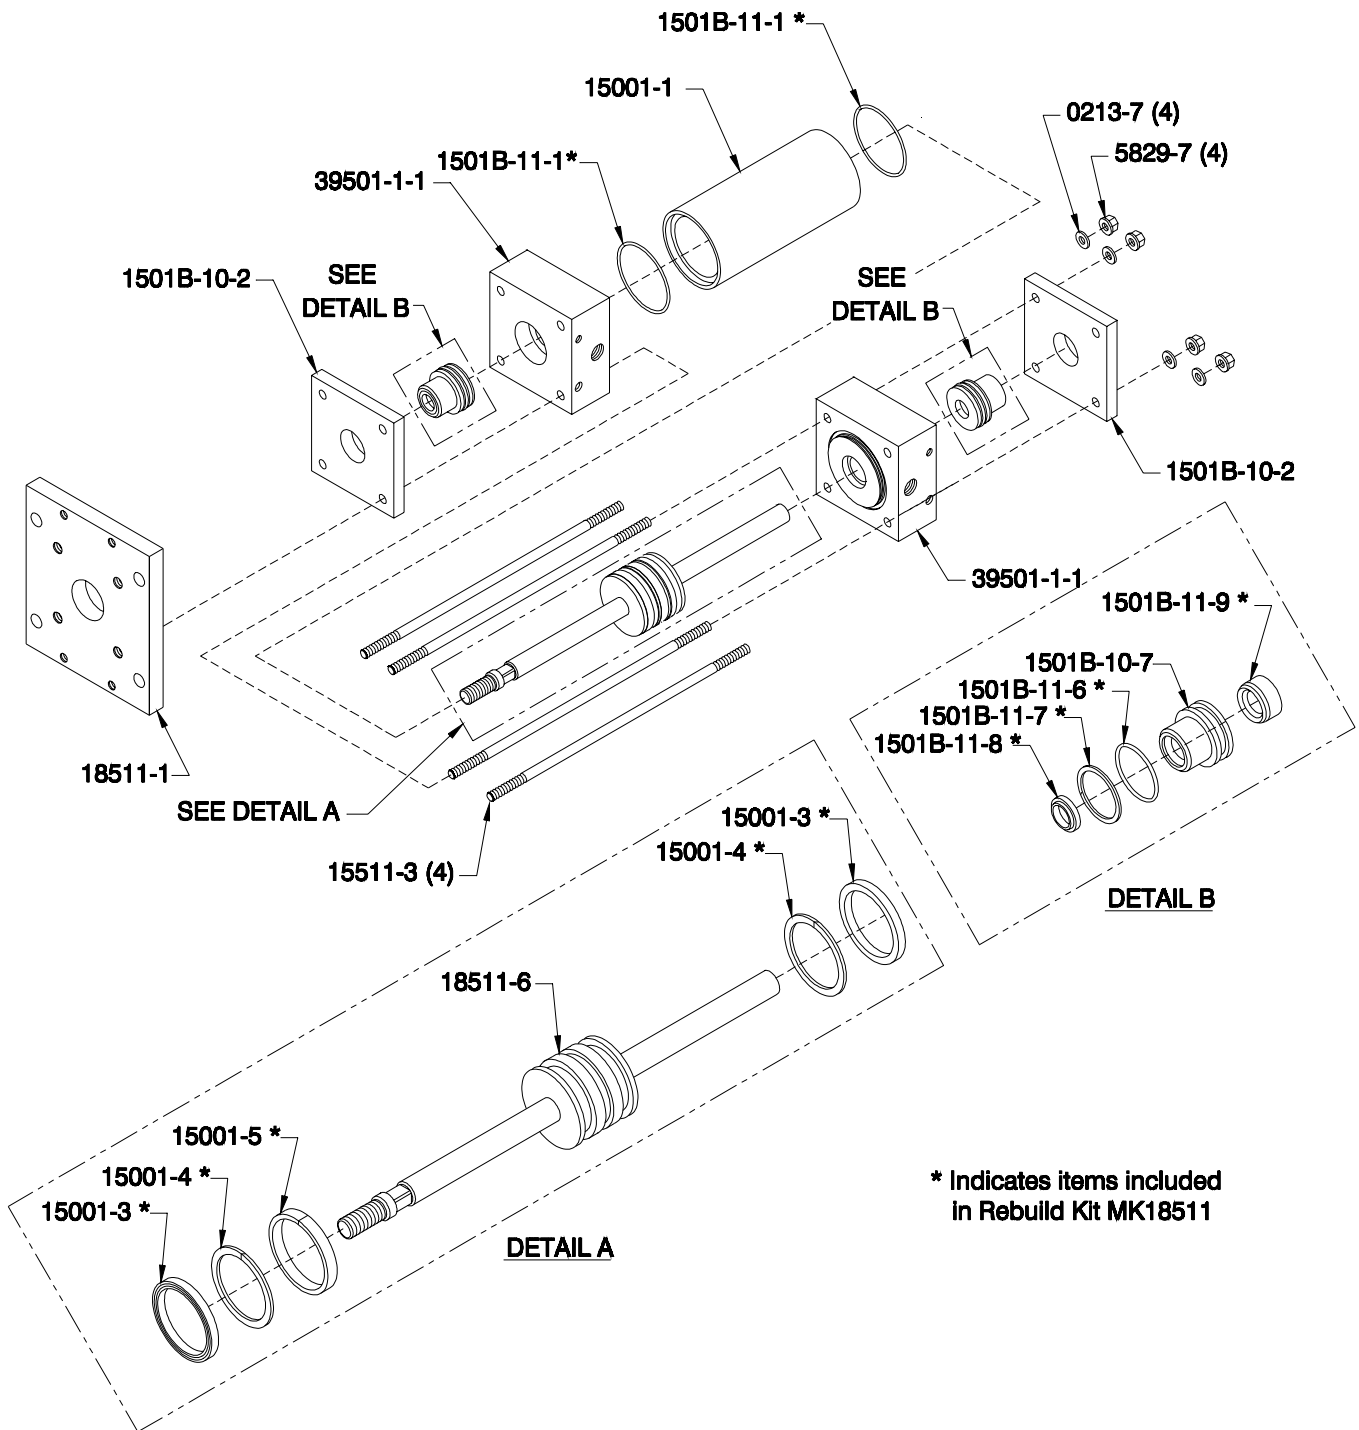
Hydraulic Cylinder Assembly, (Part No. 18511-51), Exploded View
